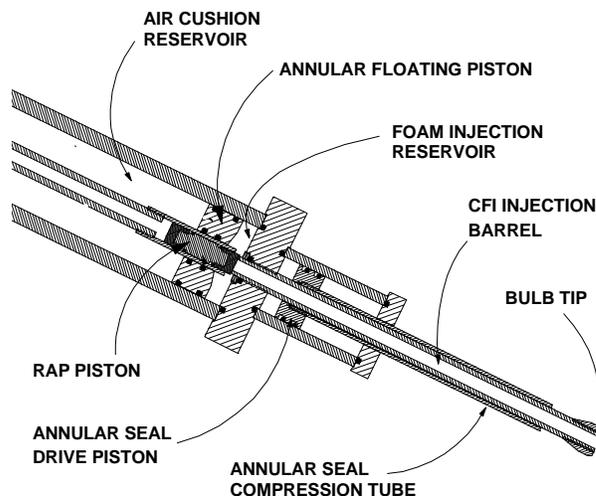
Details of reverse acting piston (RAP) valve and of annular floating piston in CFI breaker.
